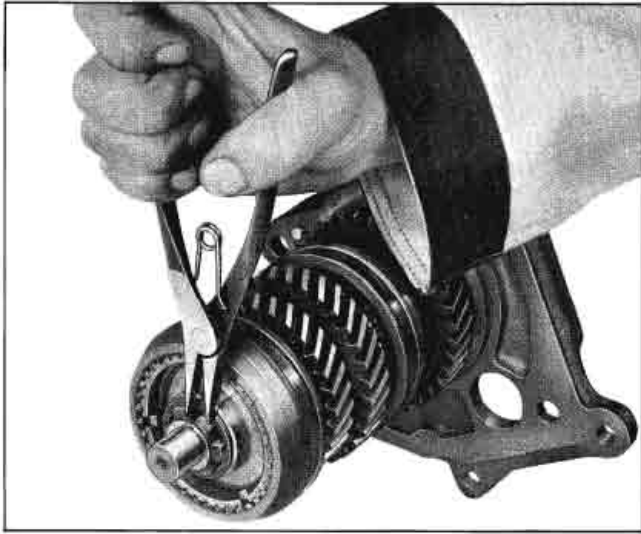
B-17 Removing or Replacing Mainshaft Front Snap Ring
